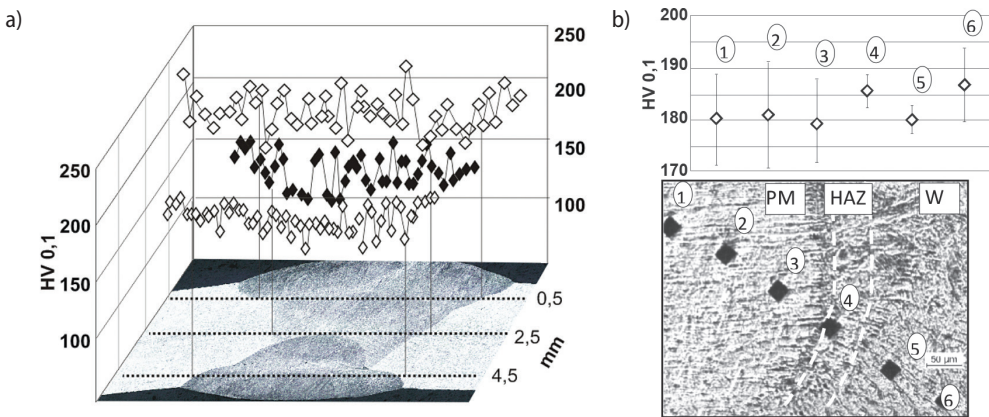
Weld microhardness research (a) and heat affected zone of TIG welded joints (b)
